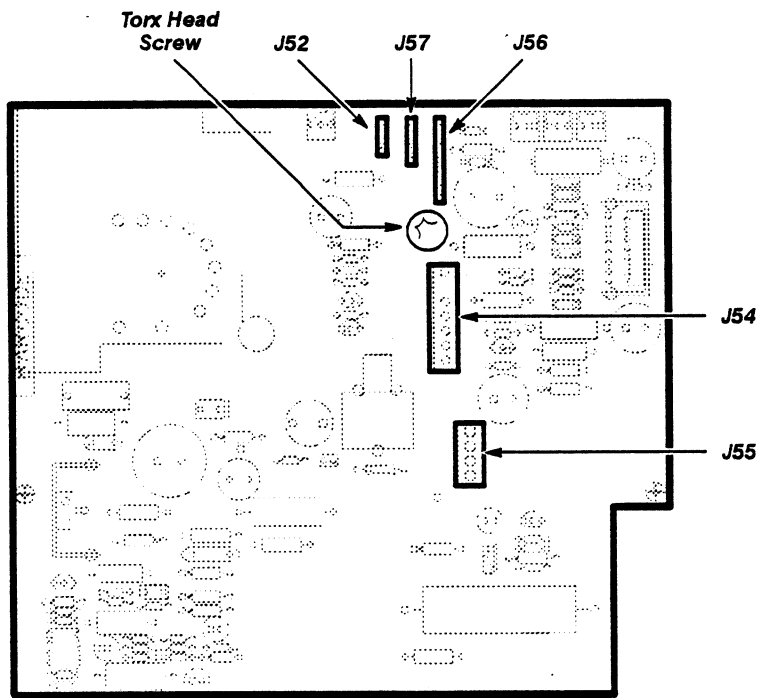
Removing/Replacing the A8 CRT Driver Board
